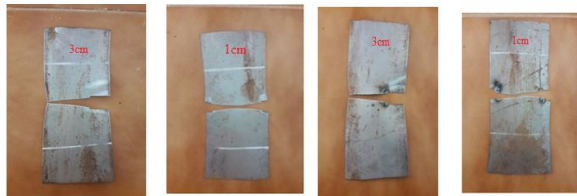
3cm crack on one side and 1cm crack on both sides with and without weld after testing
